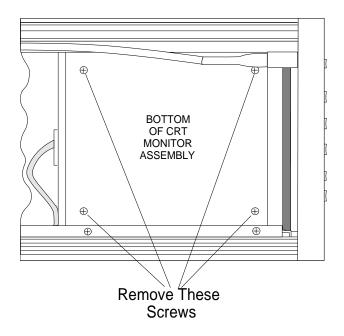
CRT Monitor Assembly Removal (Bottom)
